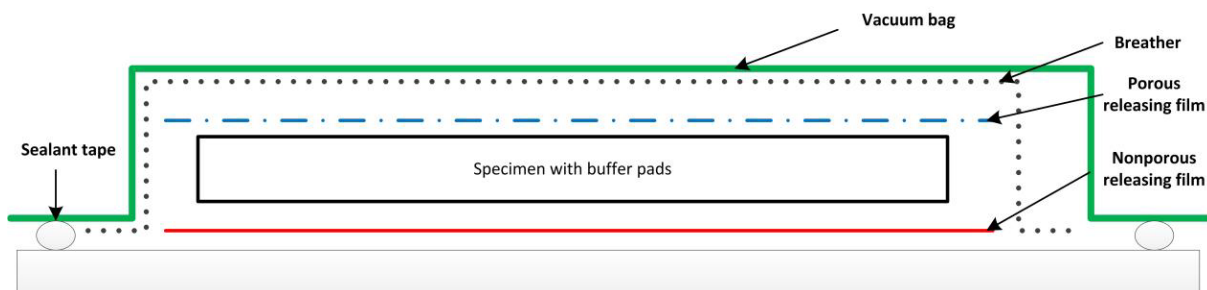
Vacuum bag assembly for buffer pad bonding
